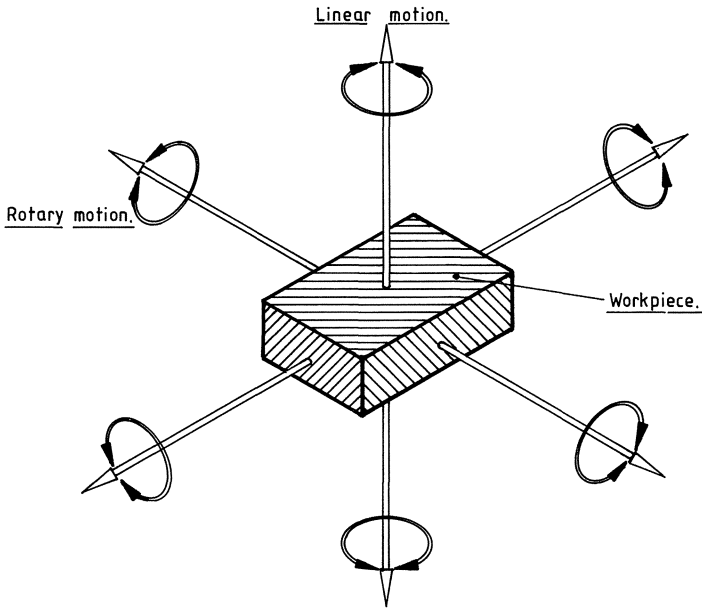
The restraint and location of the workpiece during machining operations. Restraint: a workpiece requires an applied force to overcome the cutting forces exerted during machining. Location: the workpiece must be positively located in a known relationship to the machine tool axes.
